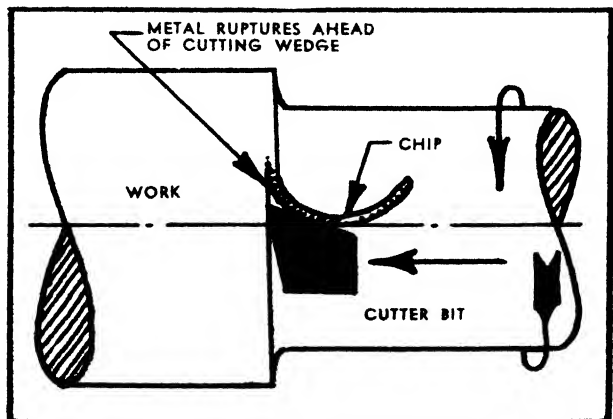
CUTTING ACTION OF LATHE CUTTER BIT.
